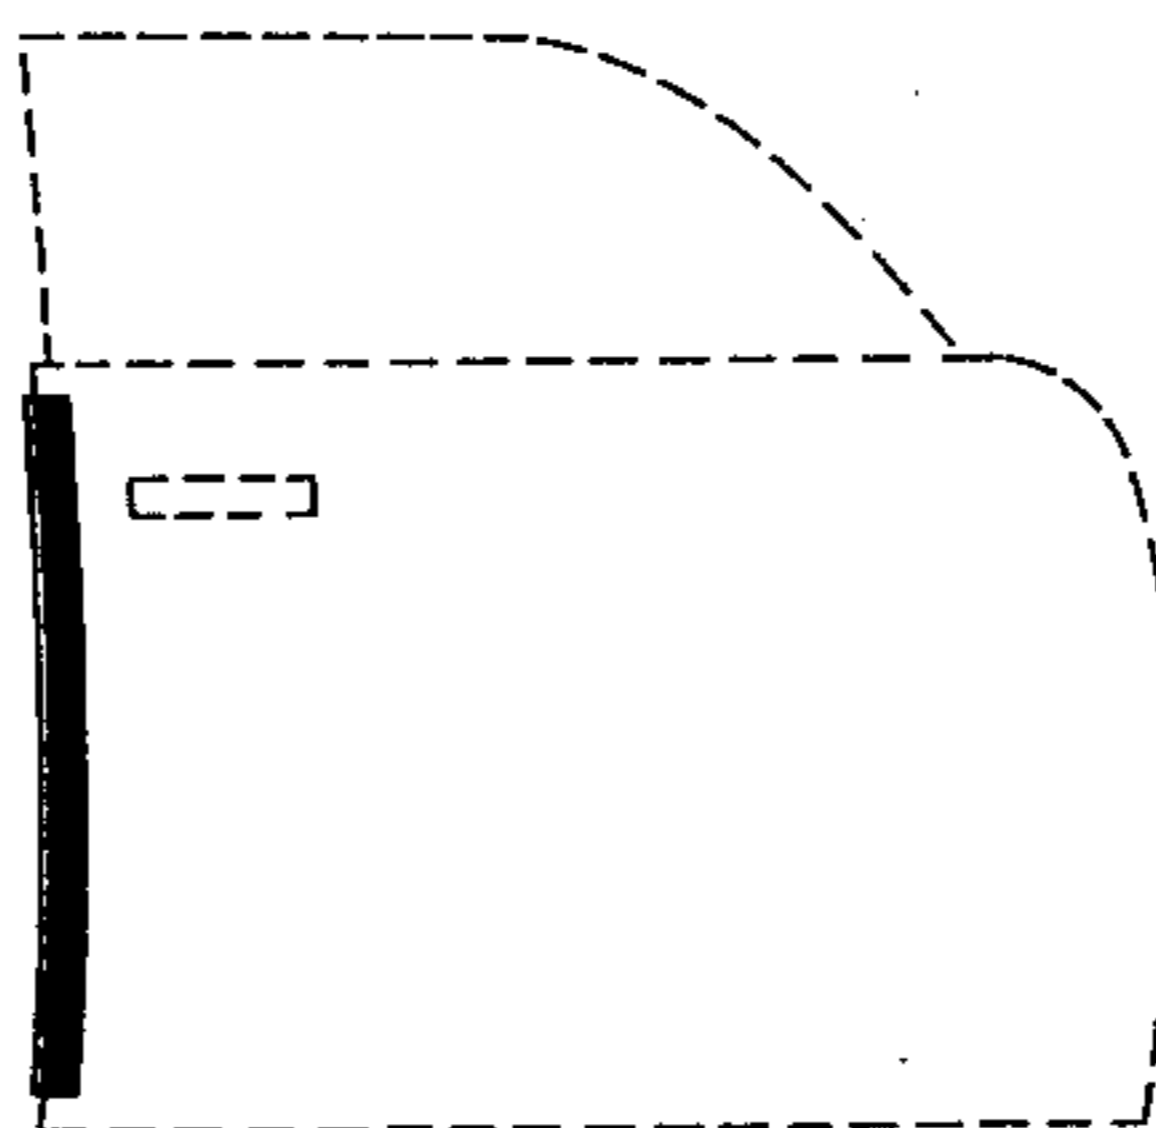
is a top plan view of a door edge guard showing a fifth embodiment of my new design; and
